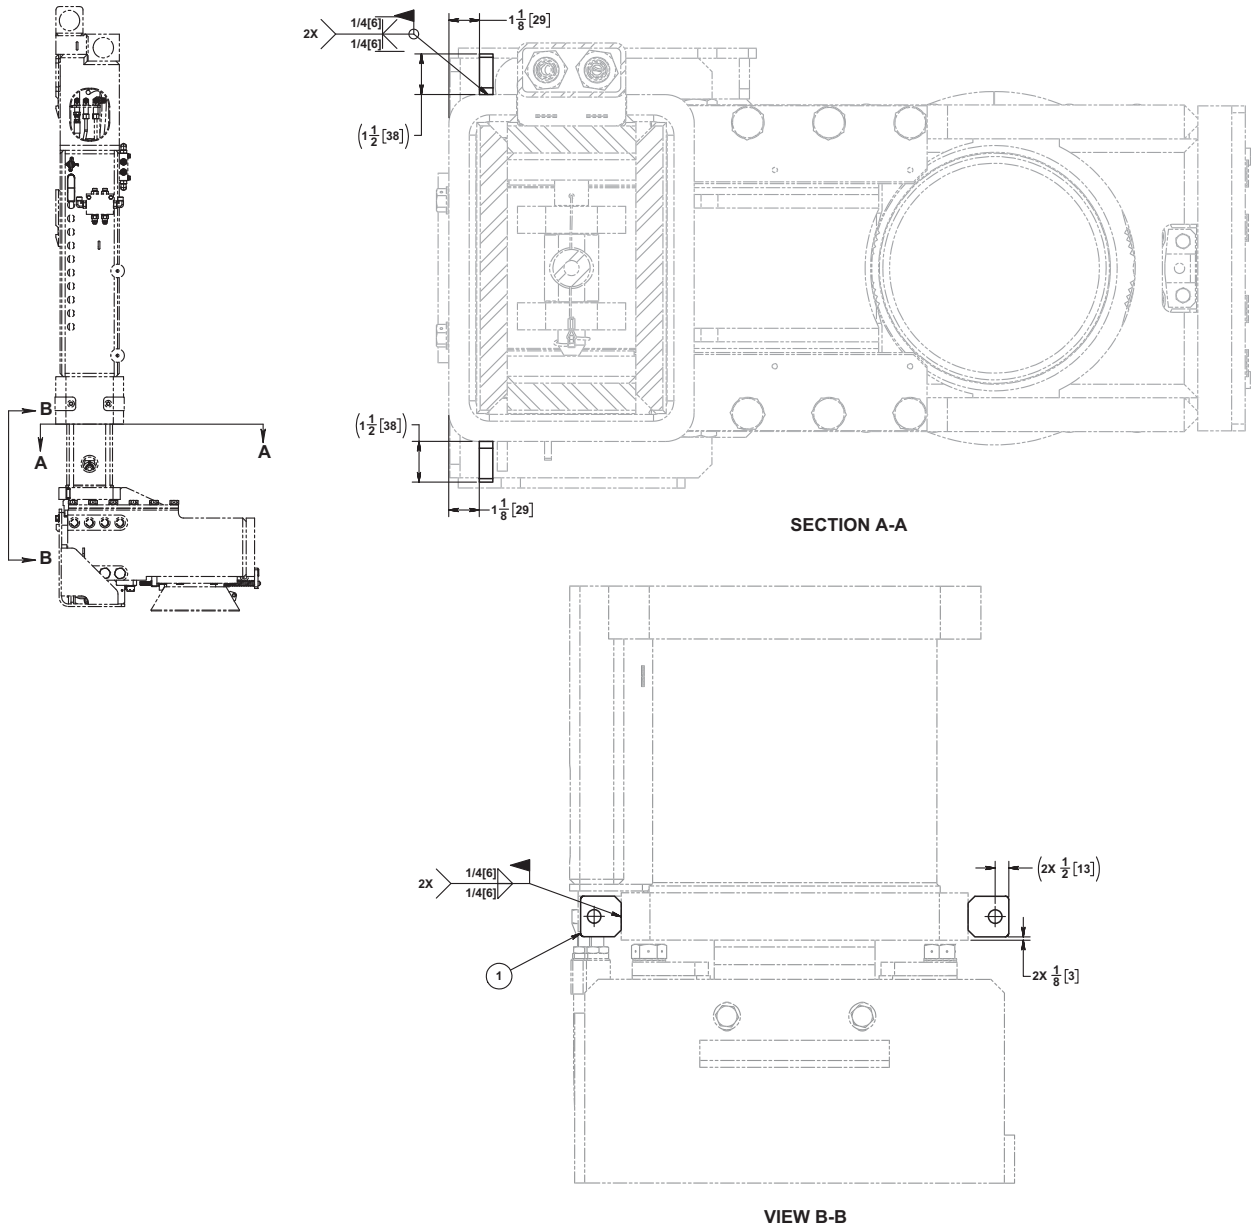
Item 1 (DT26999) Welded plate location
